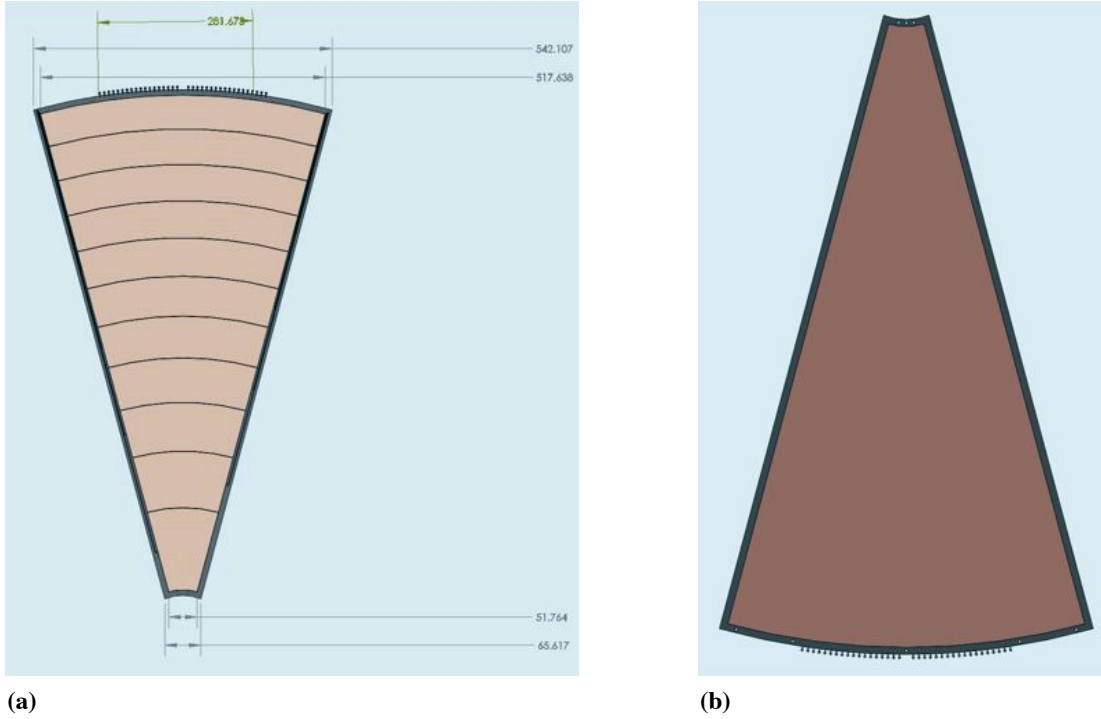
GEM foil layout of large triple-GEM segment showing the segmented side (a) and unsegmented side (b). The location of HV pins can be seen at the outer radial region in both drawings.
